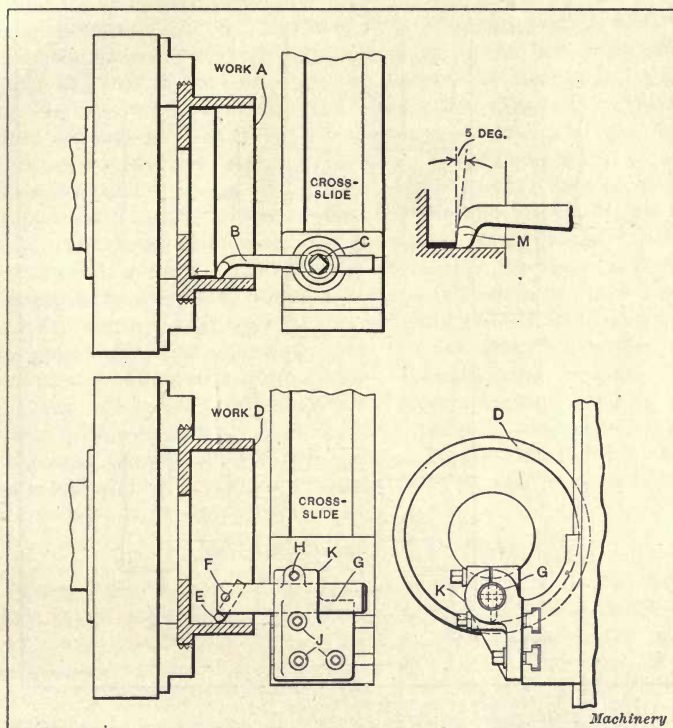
(Upper View) Forged Type of Boring Tool; (Lower View) Boring Tool with Inserted Cutter
